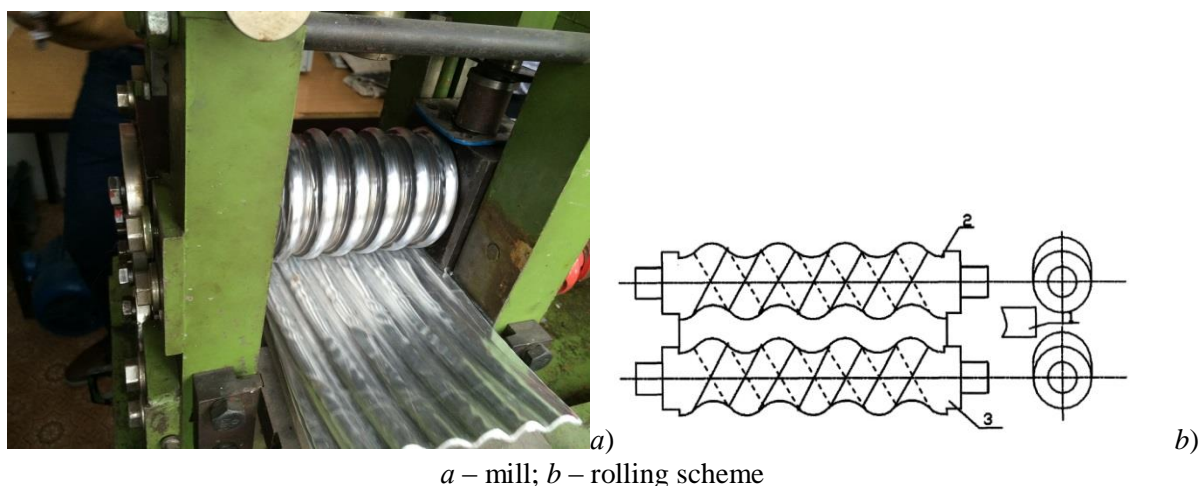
Rolling mill with two spiral rolls: 1 – workpiece; 2 – upper roll; 3 – lower roll
